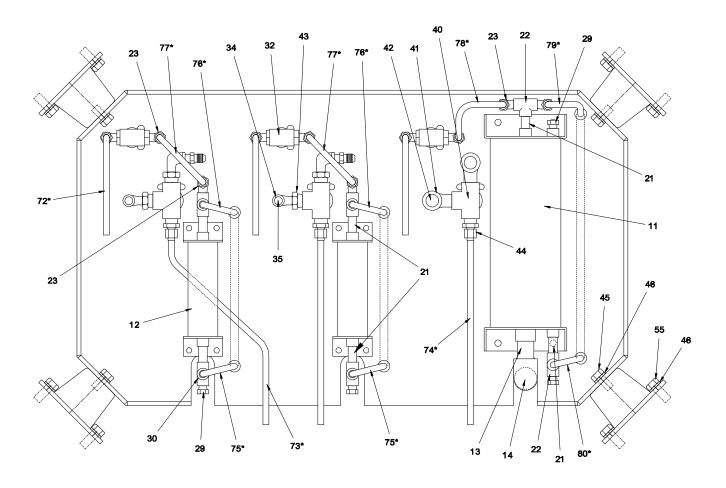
Control Panel Sub-Assembly (Sheet 3 of 3).
